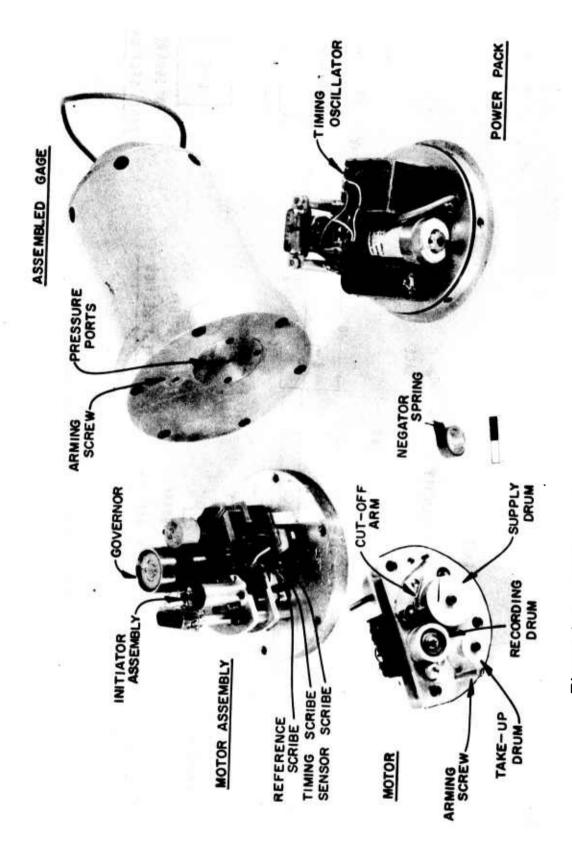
Exploded View of Self-Recording Pressure Gage
